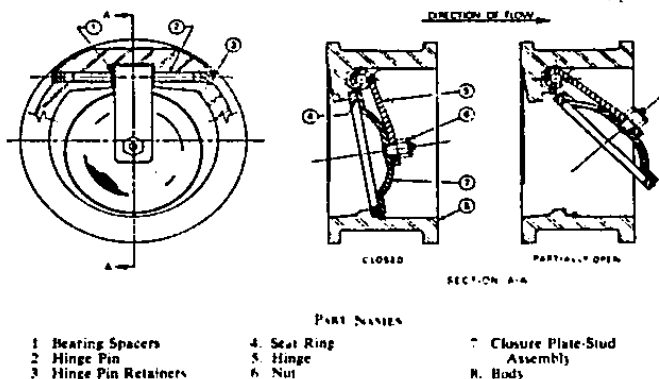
Typical Single Plate Wafer-Type Check Valve.
